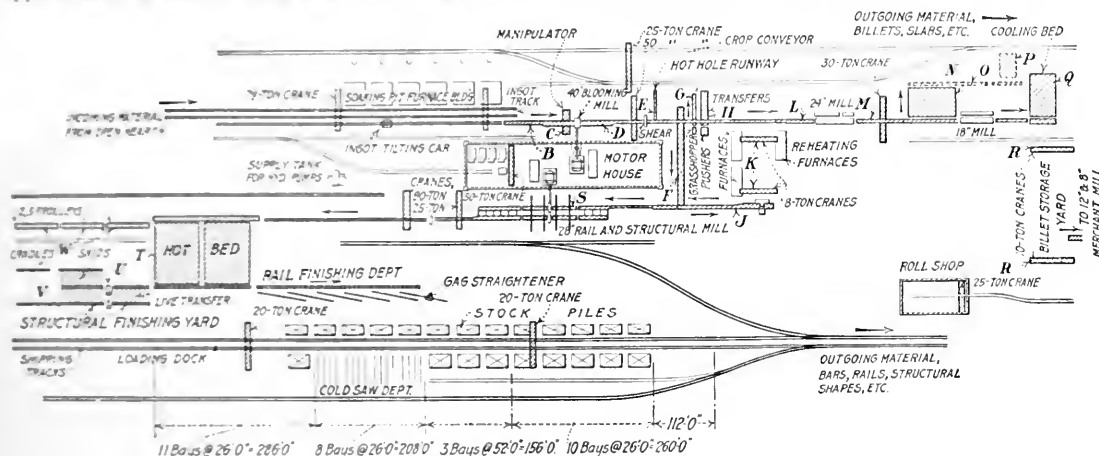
GENERAL PLAN OF 40-IN. BLOOMING MILL AND SHEET-BAR AND BILLET MILL
